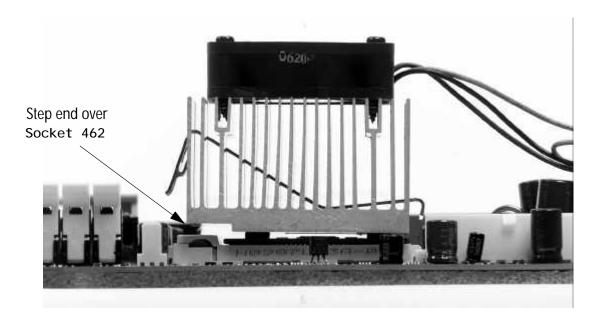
The Heatsink Partially Installed and Resting on the Rubber Pads
